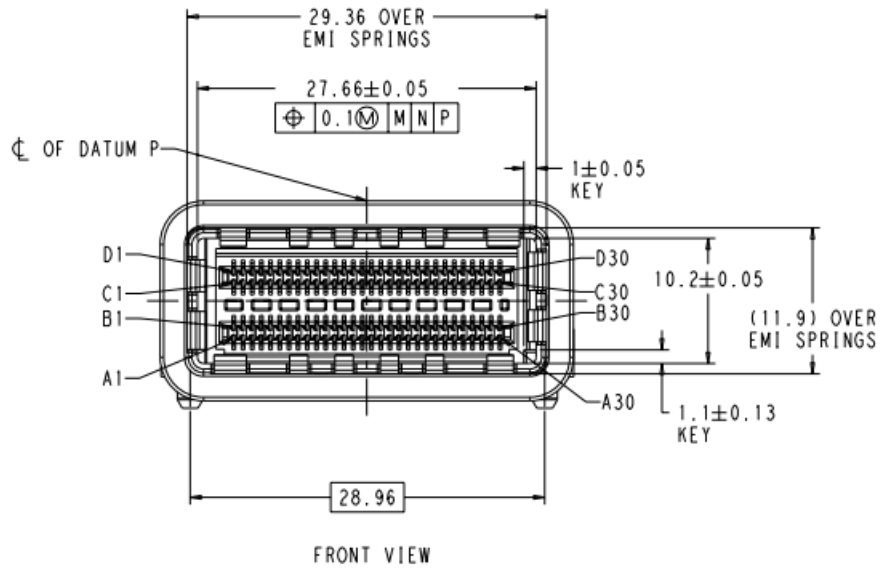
X16 Through-Hole Cage/Connector Assembly
